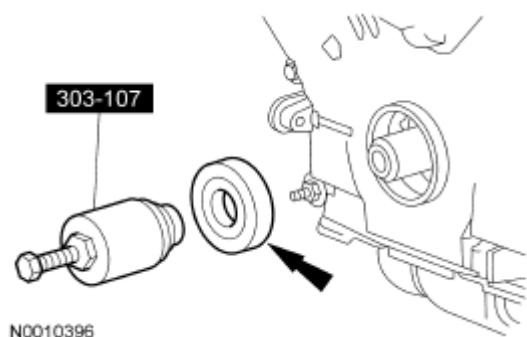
Identifying Crankshaft Front Seal And Special Tool
